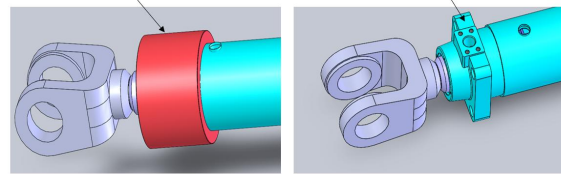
Example of Component Replacement in a Hydraulic Cylinder
